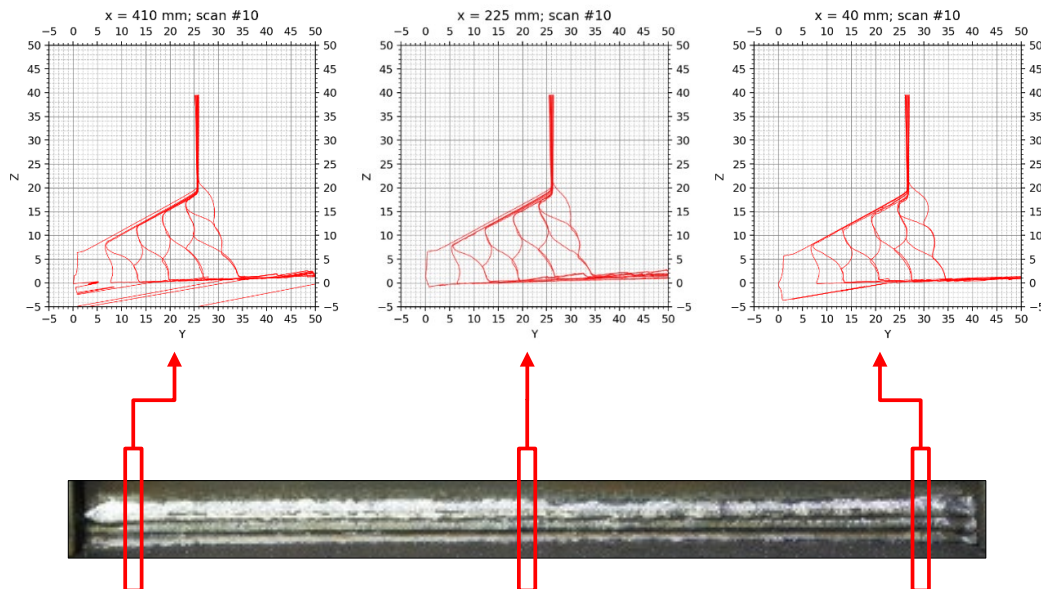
The weld appearance of small-scale steel specimen by robotic welding system.
